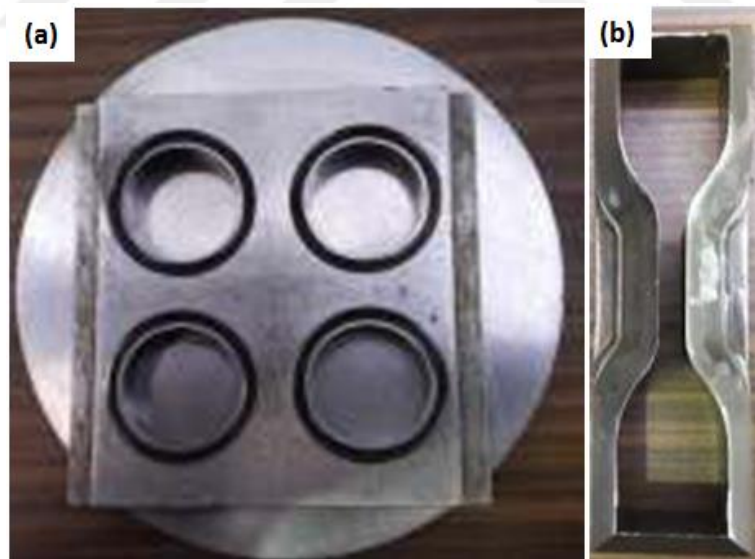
a) Test specimens for aging tests b) Cutting molds for tensile and elongation test specimens.
